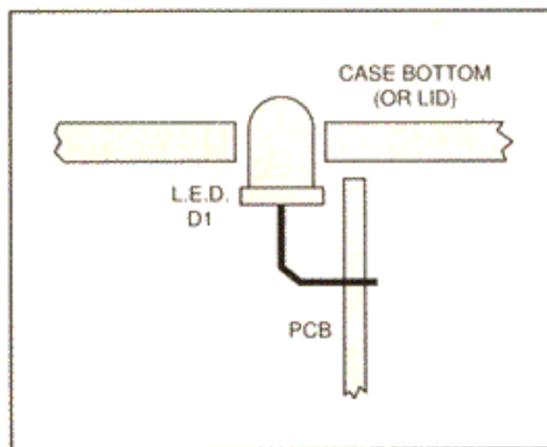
Mounting the l.e.d. at right angles to the p.c.b. to align with case viewing hole.
